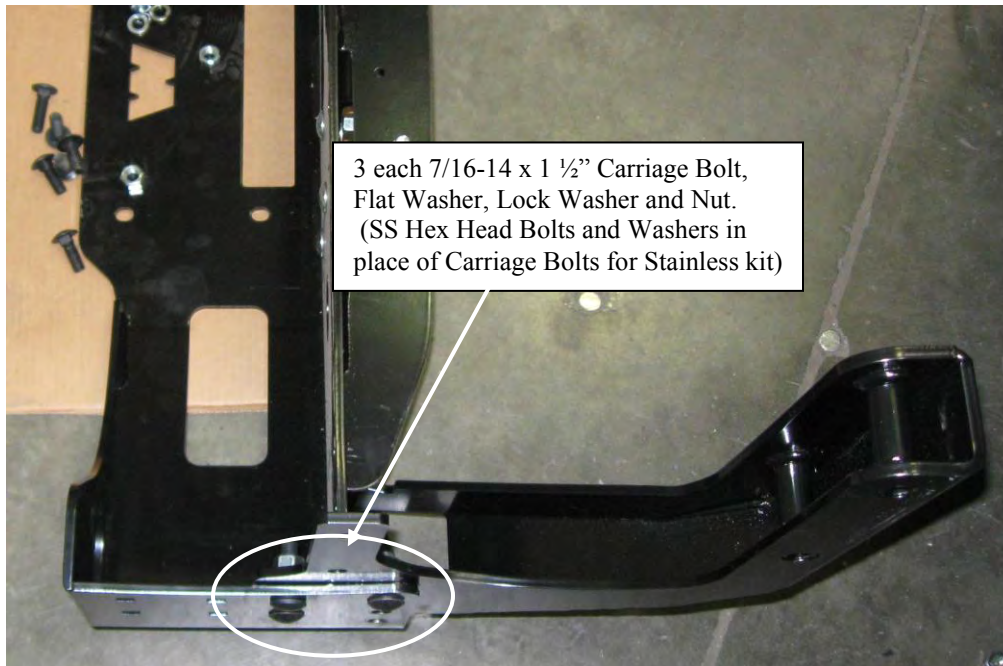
Large Frame Carrier: Installed Bottom Bracket.
